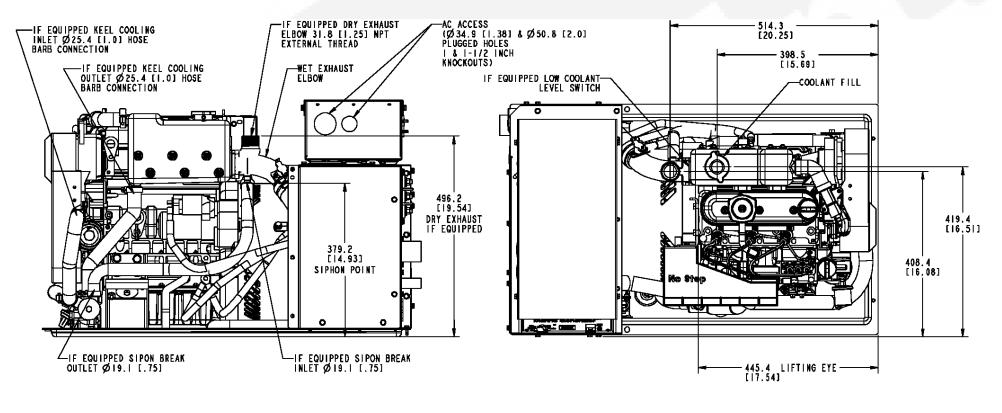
MDKBL OUTLINE DRAWING (SHEET 1)
